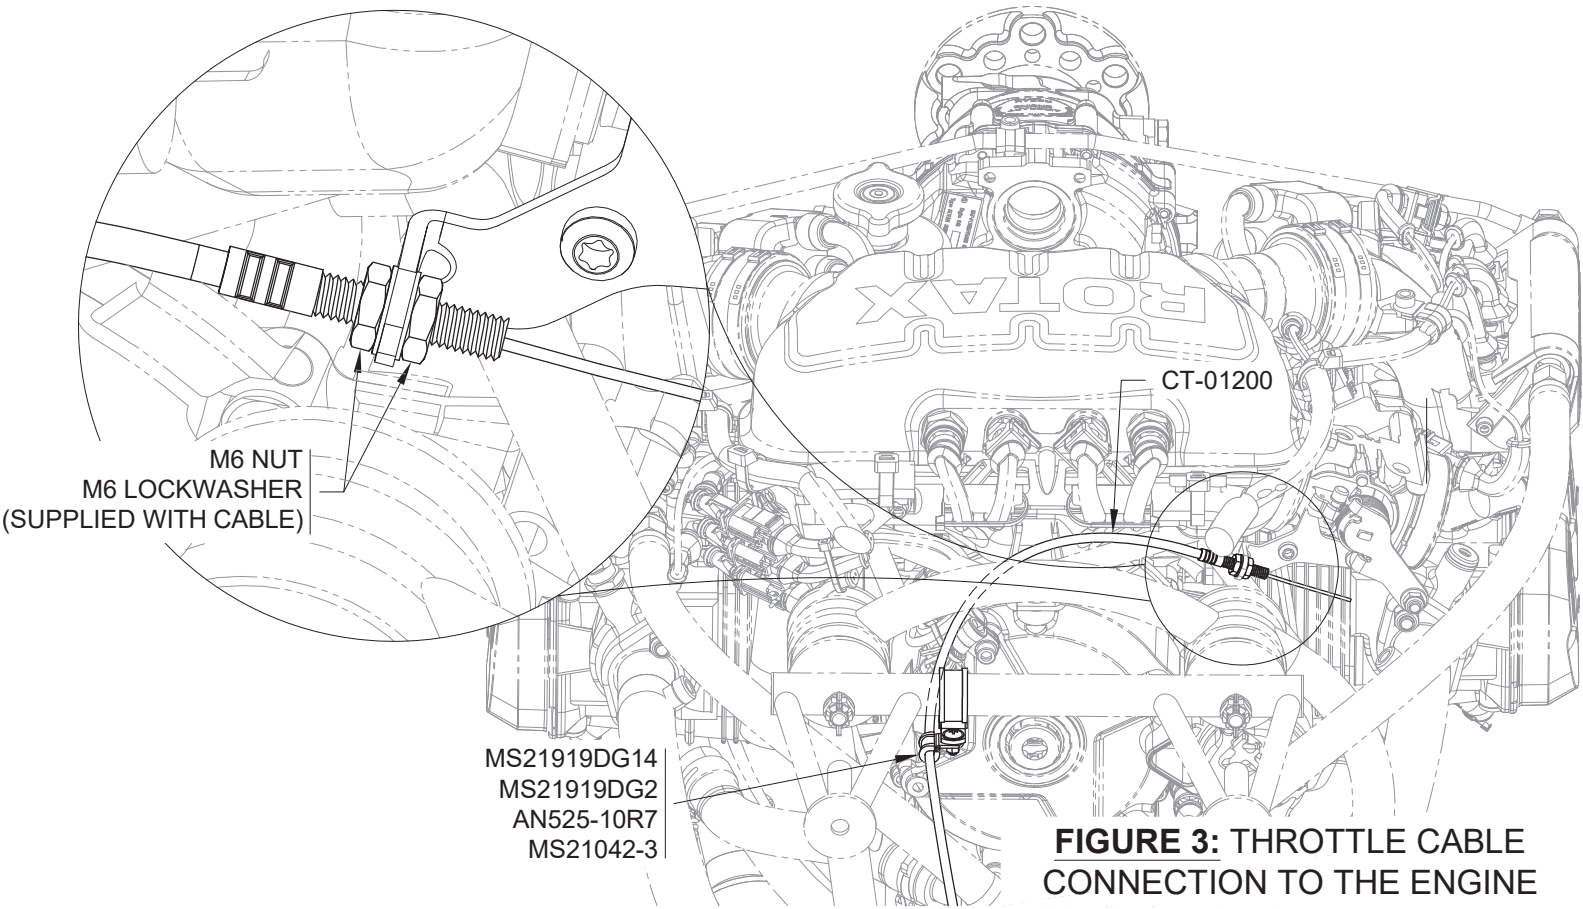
THROTTLE CABLE CONNECTION TO THE ENGINE
